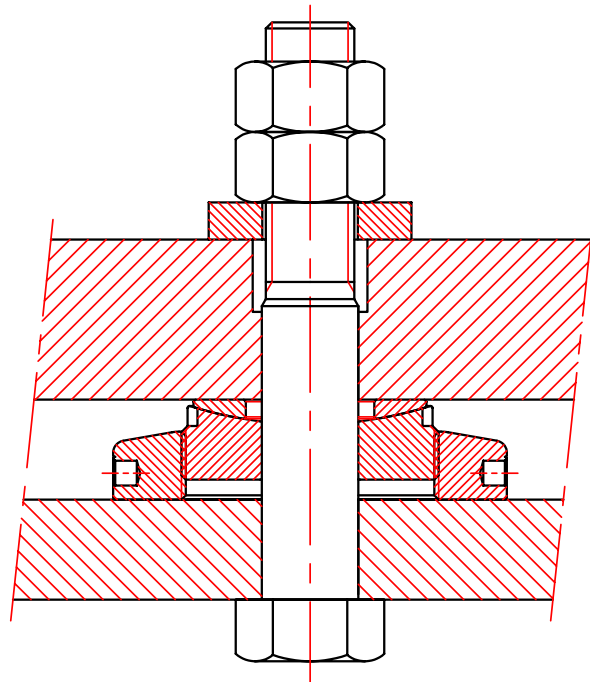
General arrangement of Vibracon® Low Profile
